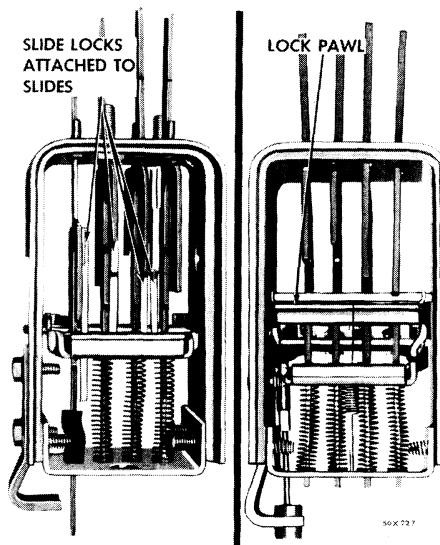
Gearshift Control Unit (Interior View). Early Design—Right View; Late Design—Left View
